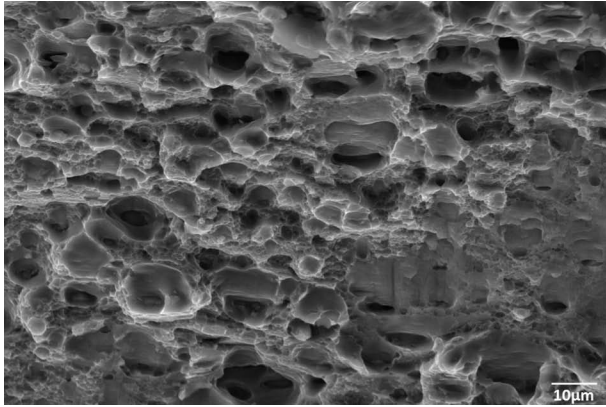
Higher magnified image of the fracture surface shown in Fig. 93
